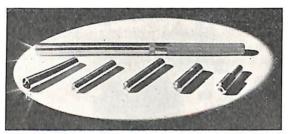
Group of diamond tools for trueing and dressing grinding wheels.
